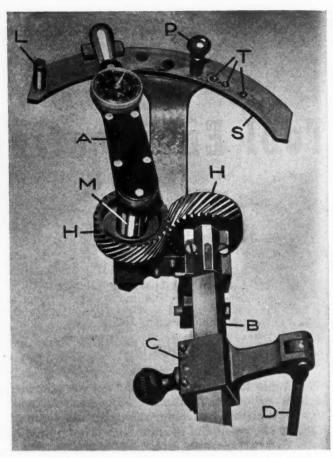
Enlarged Top View of a Portion of the Tool Shown in Fig. 1. The Dial of Torque-wrench A Indicates the Tension of the Springs in the Brush-holder
